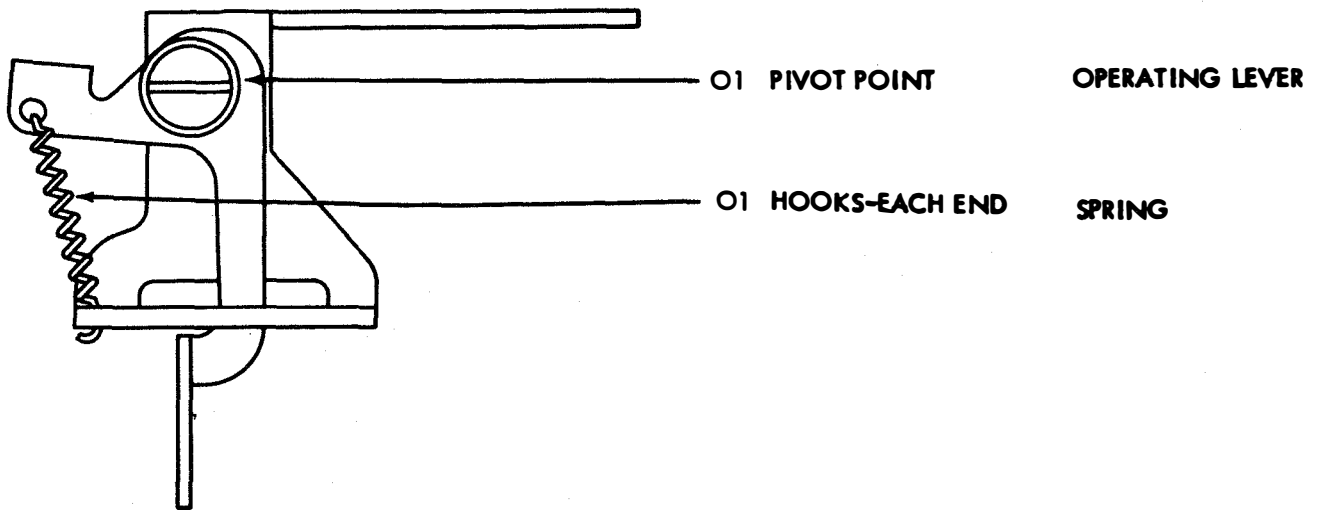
LETTERS-FIGURES Contact Mechanism, Late Design
